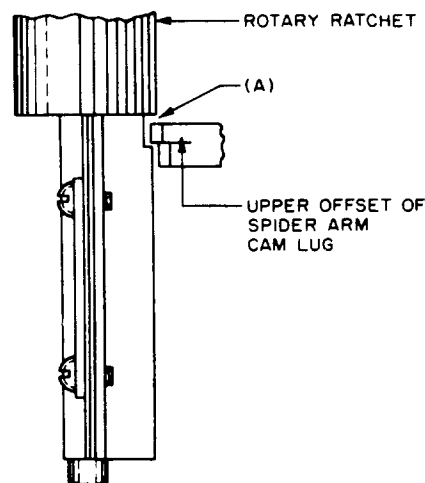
Clearance Between Rotary Ratchet and Upper Offset of Spider Arm Cam Lug
